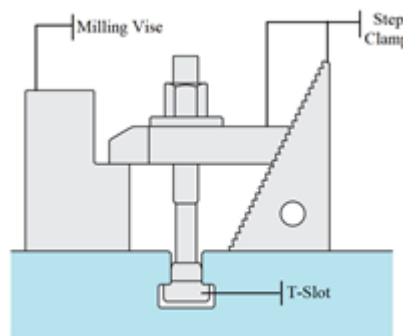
Fixture System Using a Milling Vise, T-Slots and Step Clamp [12]
